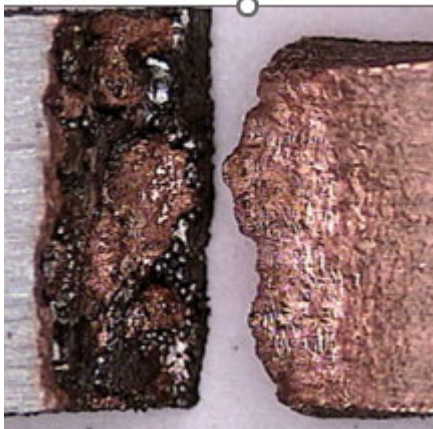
Macroscopic fracture morphology of the specimen filled with 316 powder
